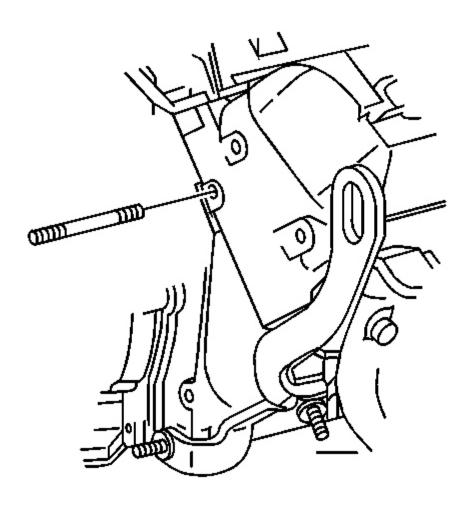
Locating Power Steering Pump Mounting Bracket Stud Courtesy of GENERAL MOTORS CORP.
